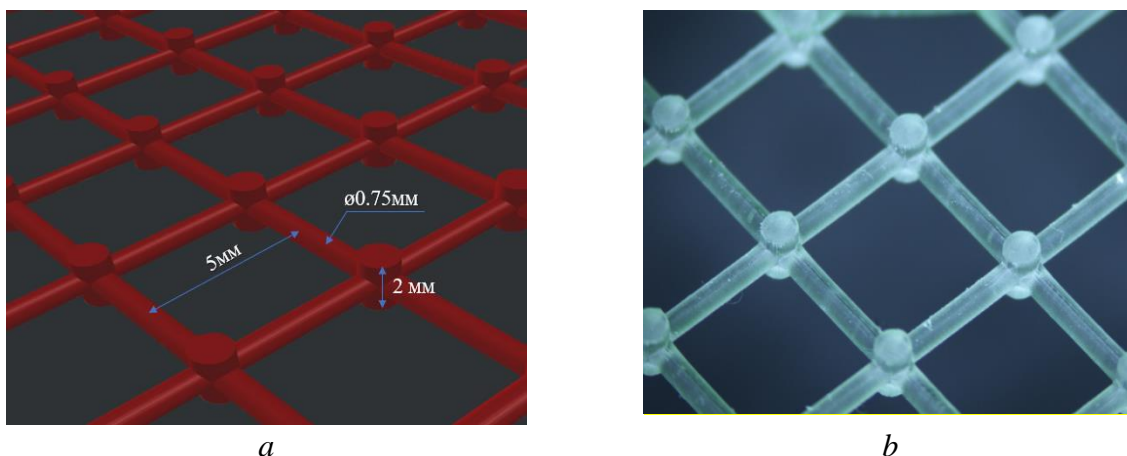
3D Model (a) and 3D Printed Version (b) of Spacer.
